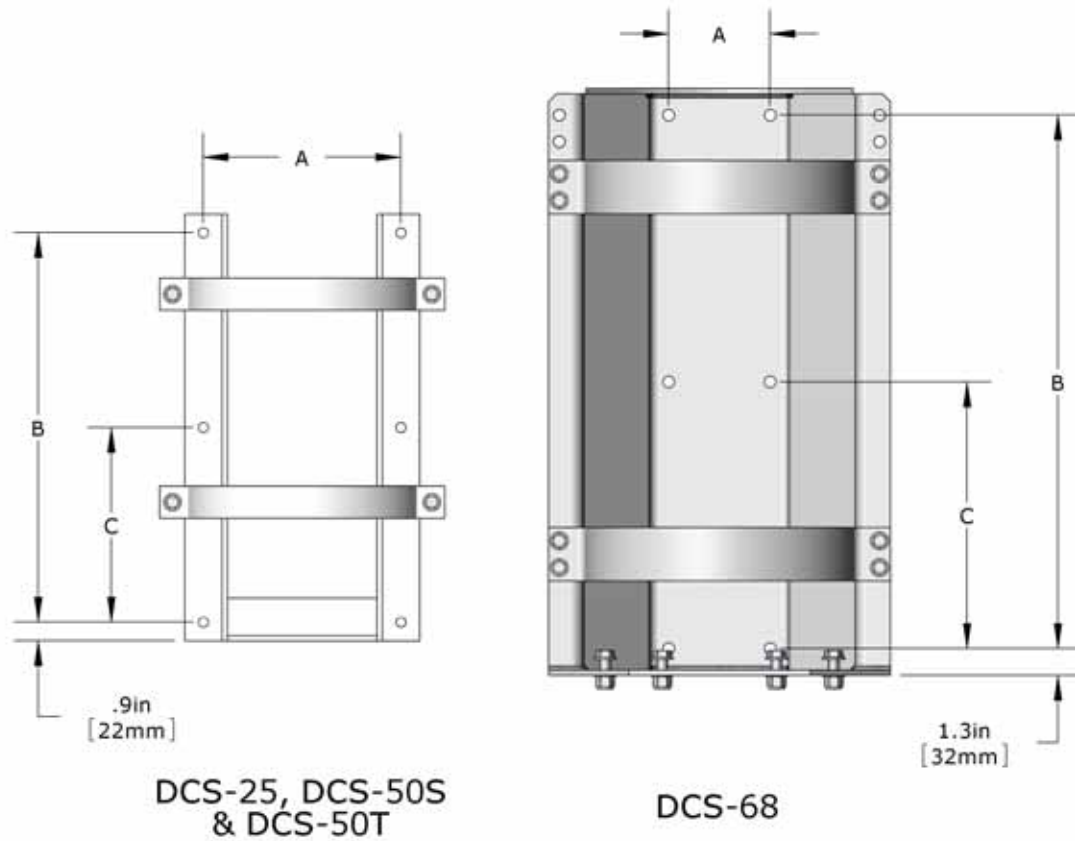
Sentinel DCS-25, DCS-50S, DCS-50T, and DCS-68 Cylinder Mounting Bracket Dimensions
